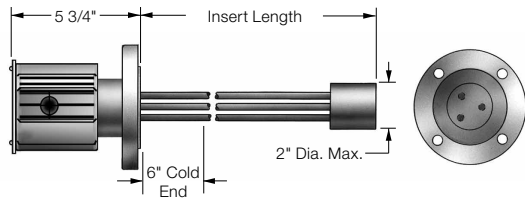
3" - 150 lb Flange (Three Straight Elements)
